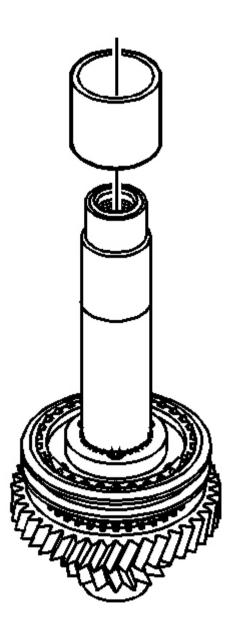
Installing Bearing Collar Courtesy of GENERAL MOTORS CORP.
